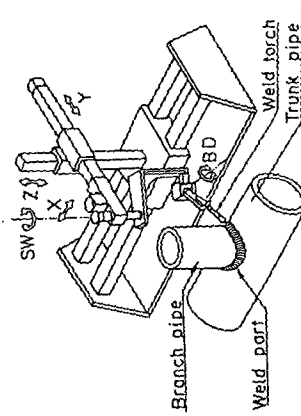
Example of application to boiler drum assembly using robot system controlled by computer simulation processing
